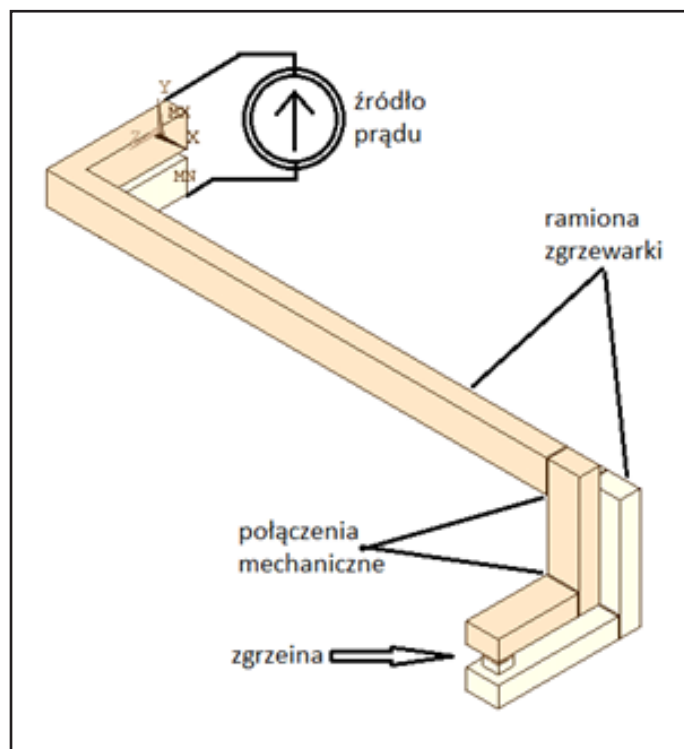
Structure of the multispot welding machine arm (current supplied to one spot) with the power supply and the area where the weld was formed
